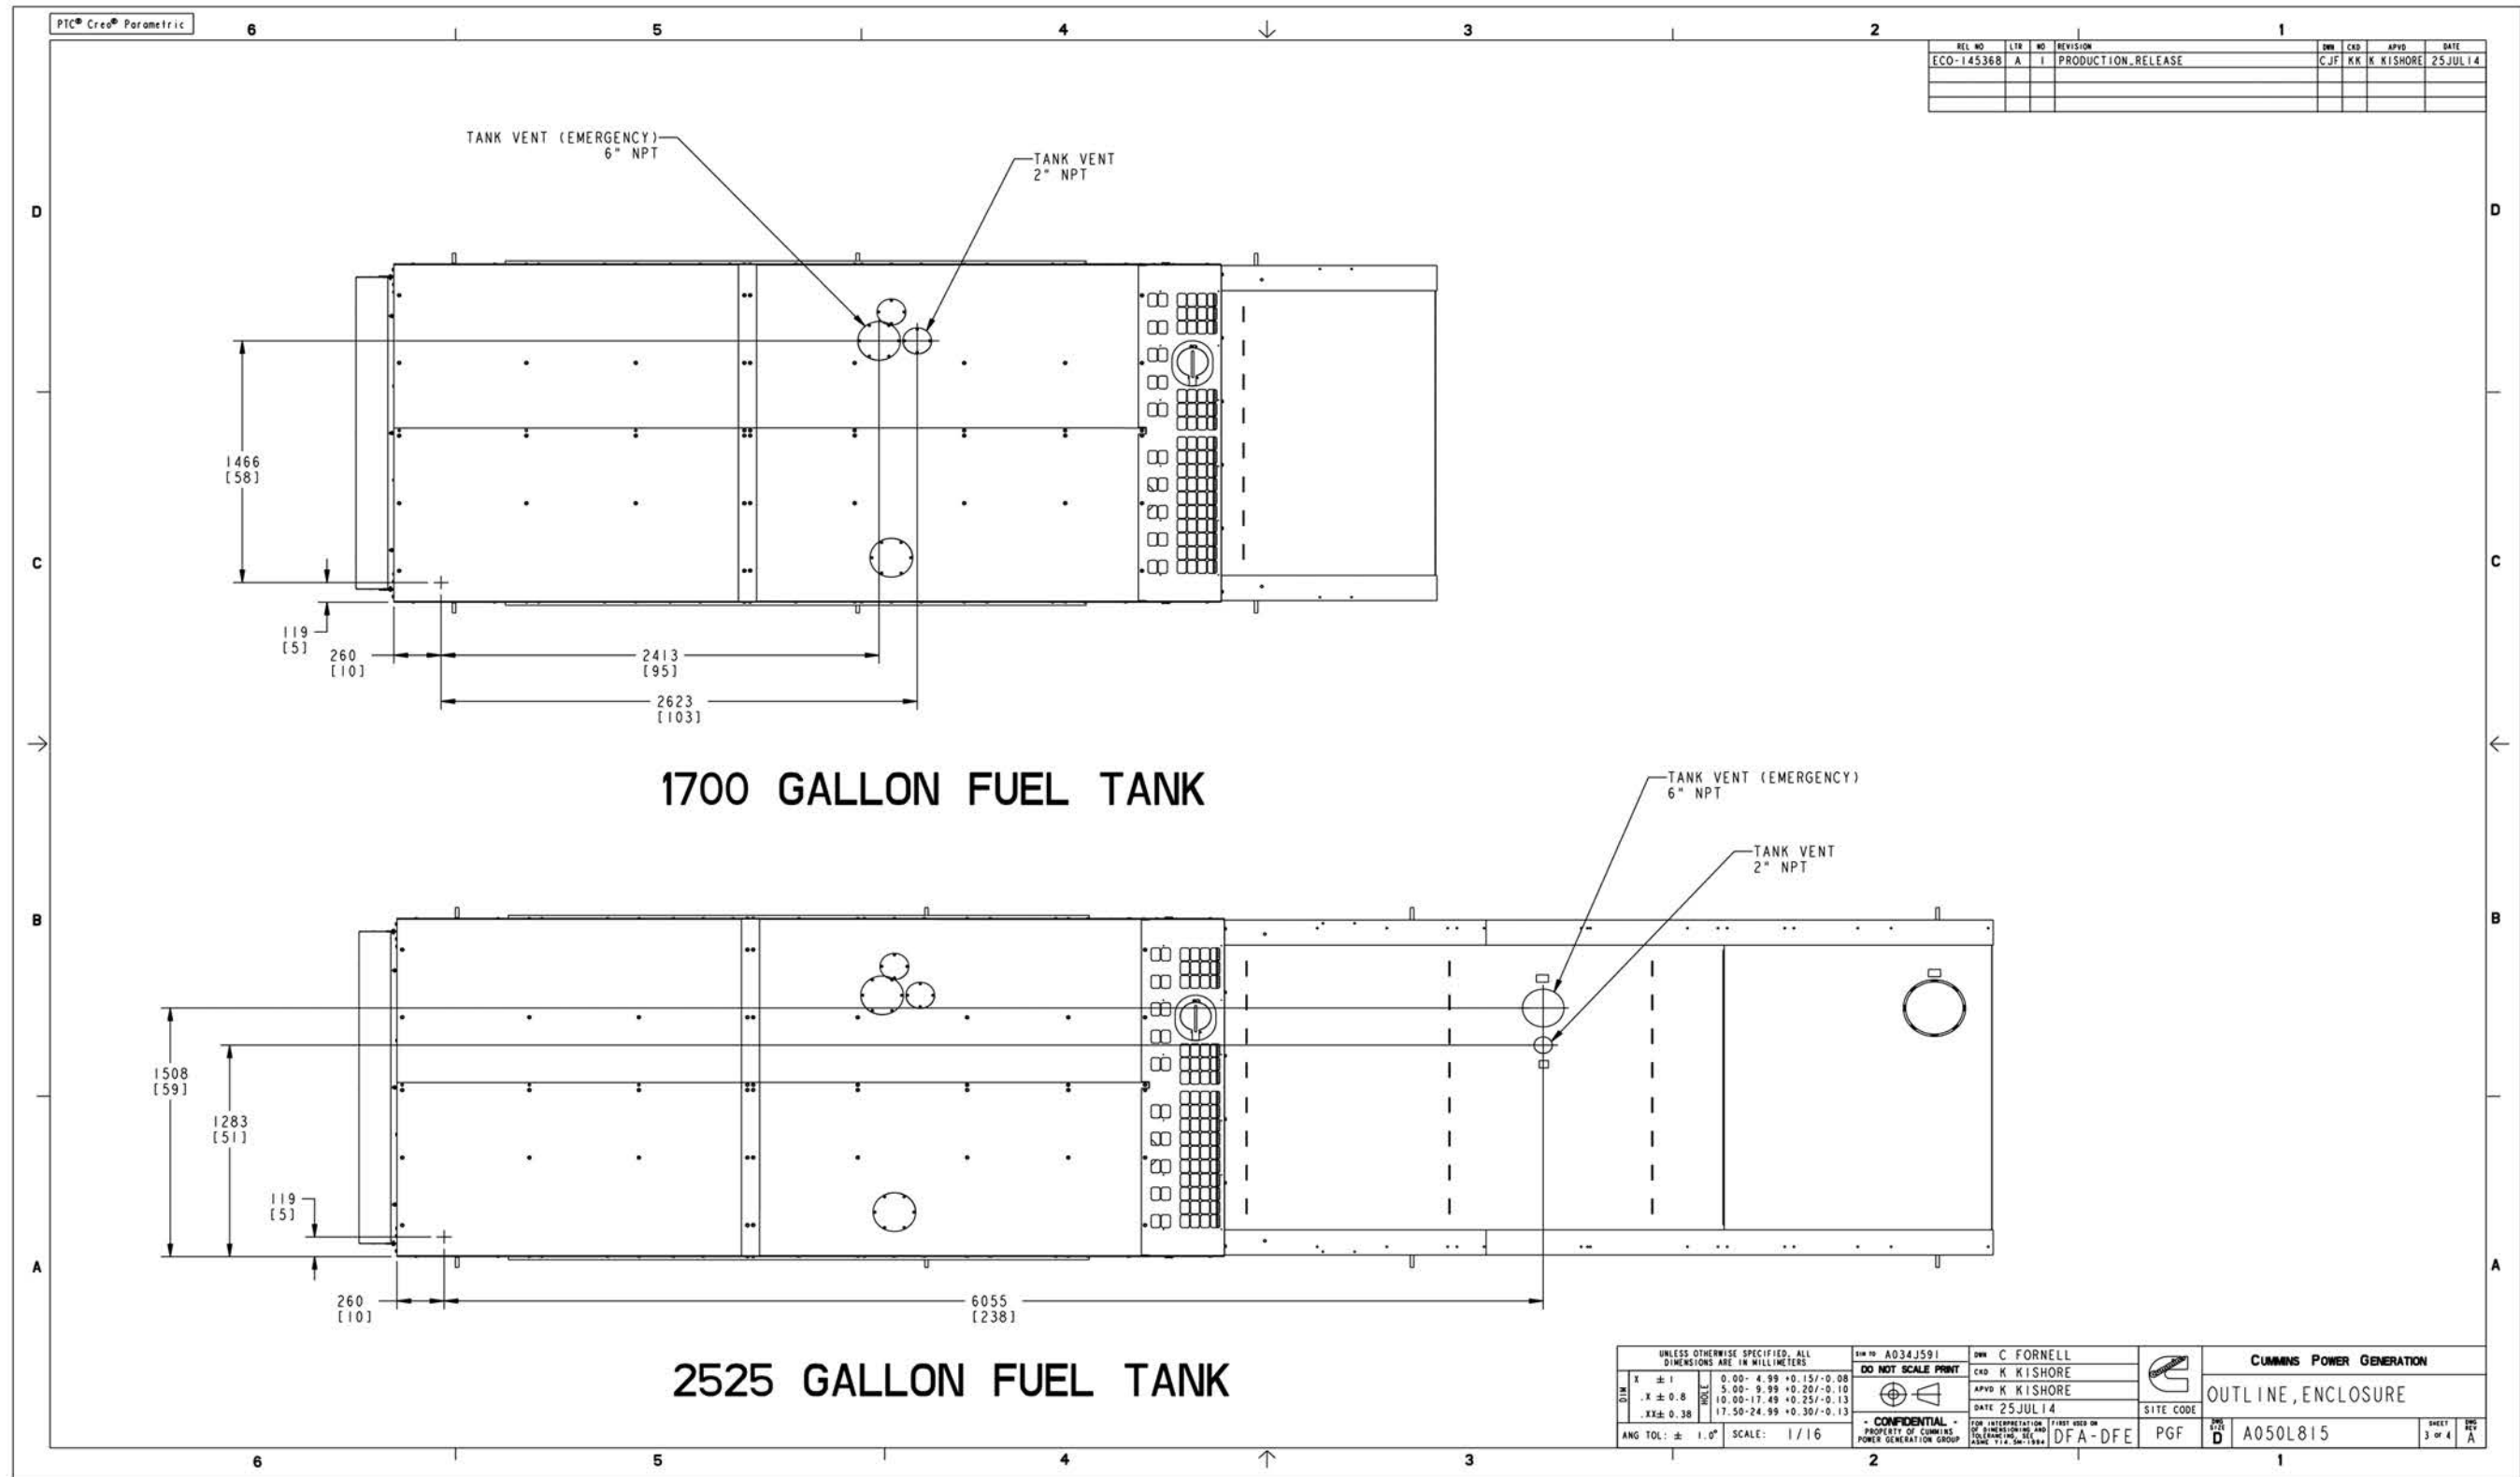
ENCLOSURE OUTLINE DRAWING F200, F201, F203, F204, F206 SHEET 3 OF 4
